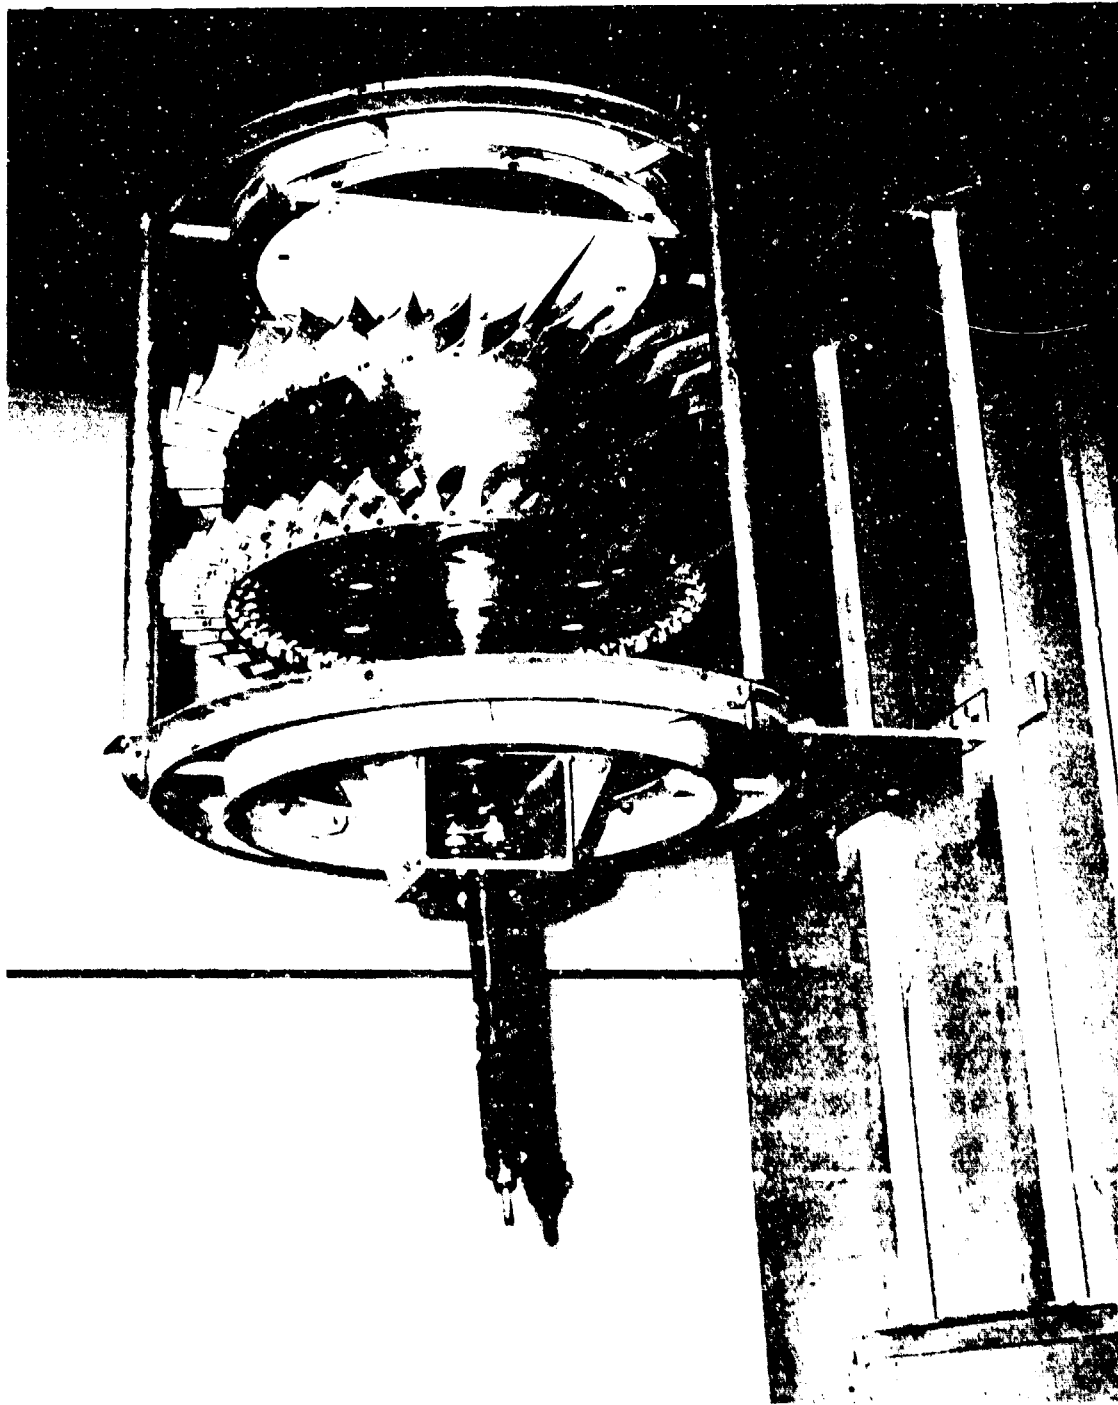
PARTIAL REAR VIEW OF ROTOR ASSEMBLY
